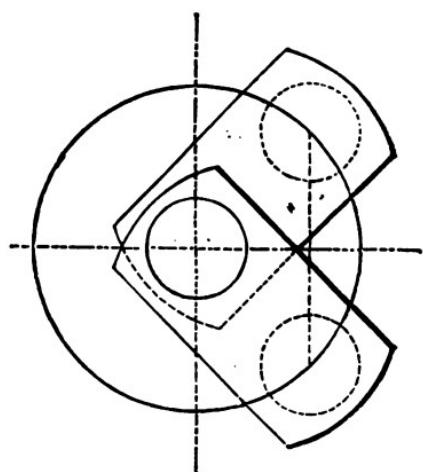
Position of the Cranks for testing the Valves and Pistons.
